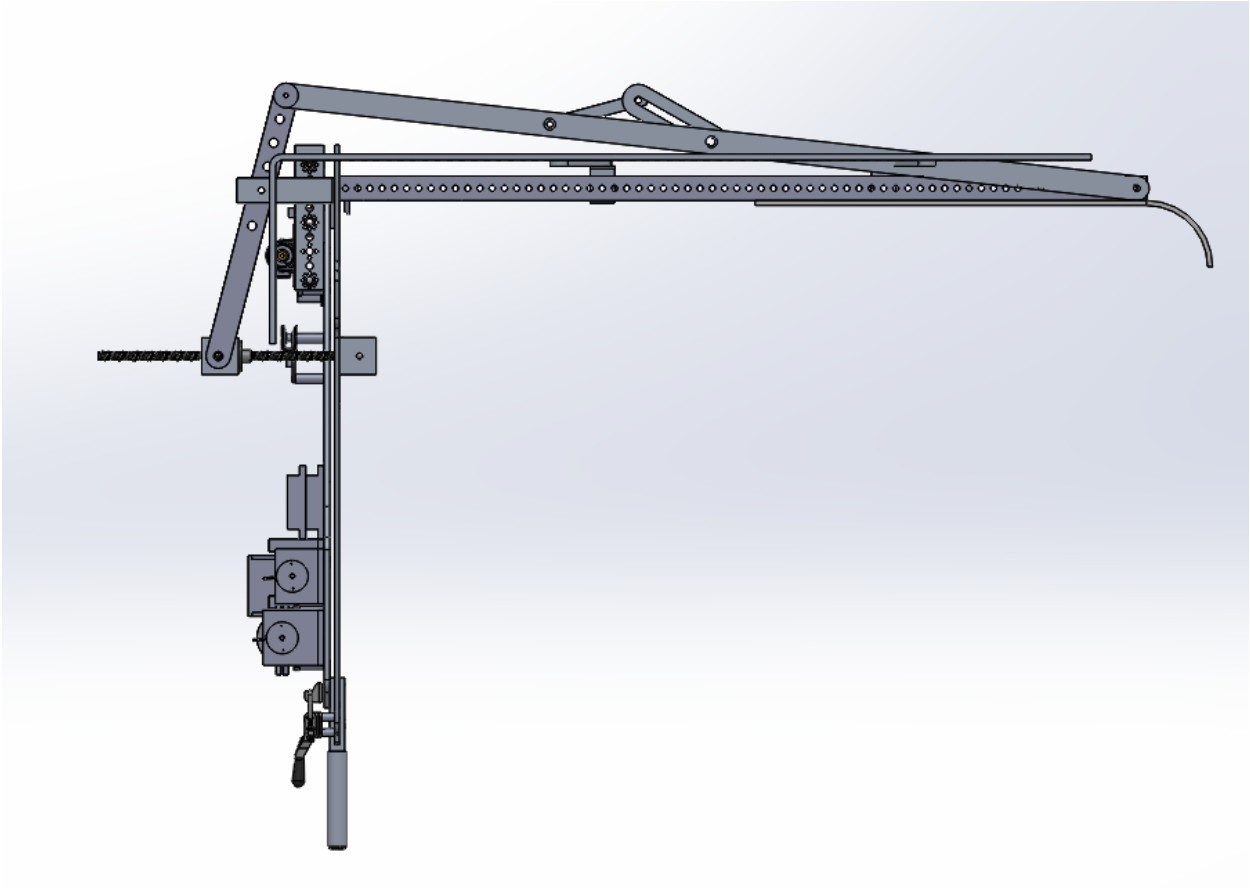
Isometric rear view of the winch assembly attached to the vent mount assembly.
